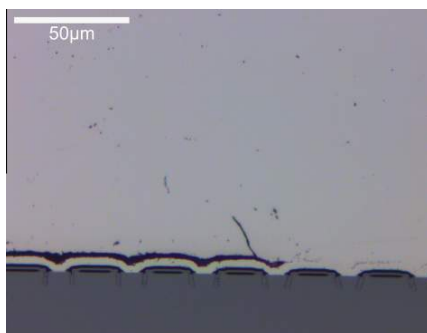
Cross-sectional image of the heel of a wire bond in a failed module.
